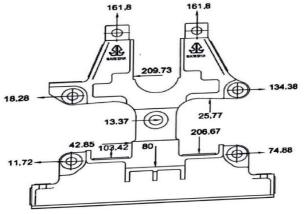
Sugar Mill Headstock Assembly and Loading Diagram
